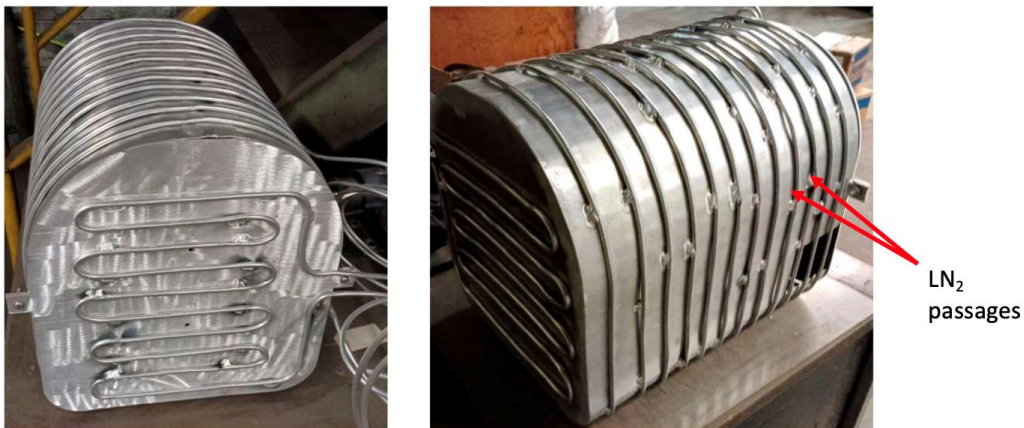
Aluminum sub-enclosure featuring the cooling LN₂ tubing. Note that the final installed unit has nearly continuous solder applied along cooling tube lines.
